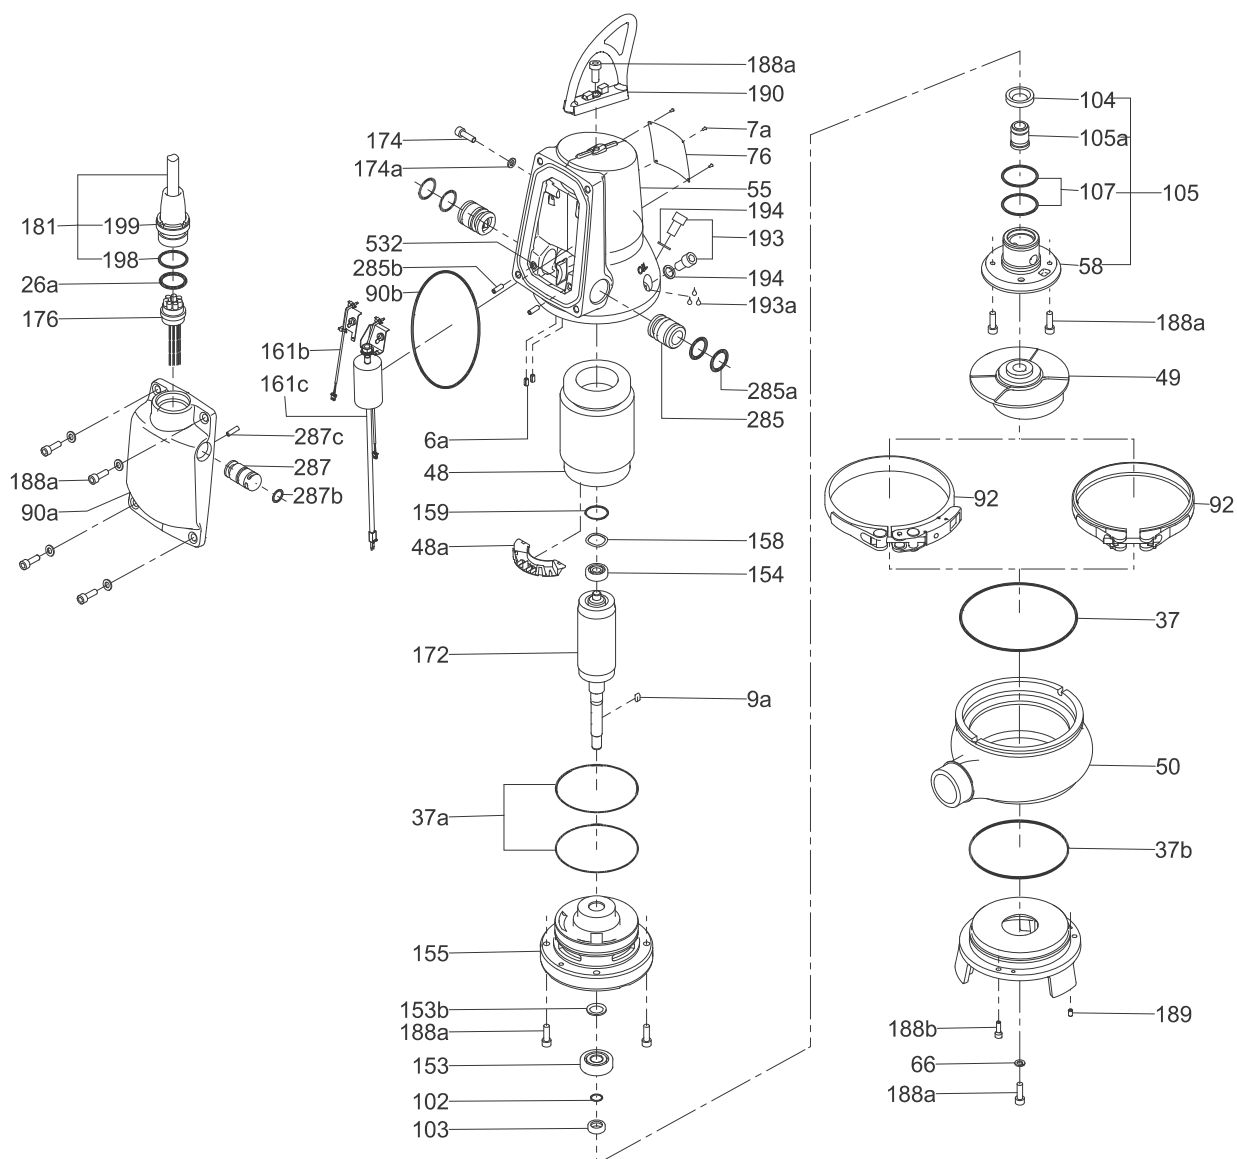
Exploded view, EF AUTO_{ADAPT}
